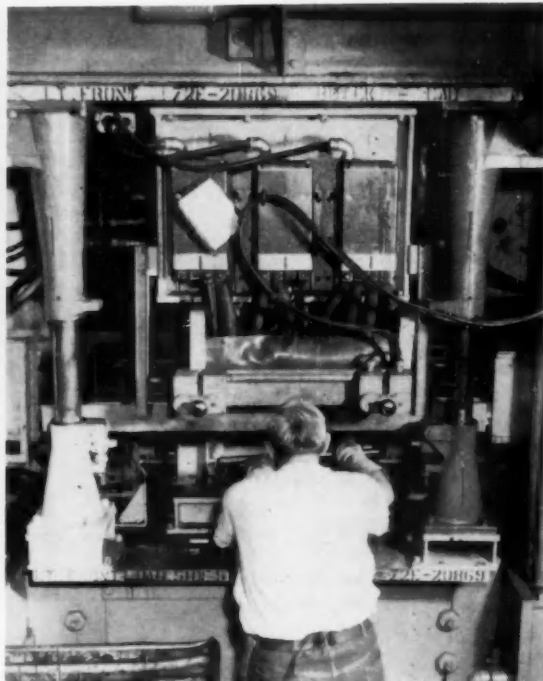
In this press, a belt reinforcement is welded to an inner door panel adjacent to the window opening. Anti-repeat shot pins prevent the die from closing until they are withdrawn when hands press separate palm buttons.
